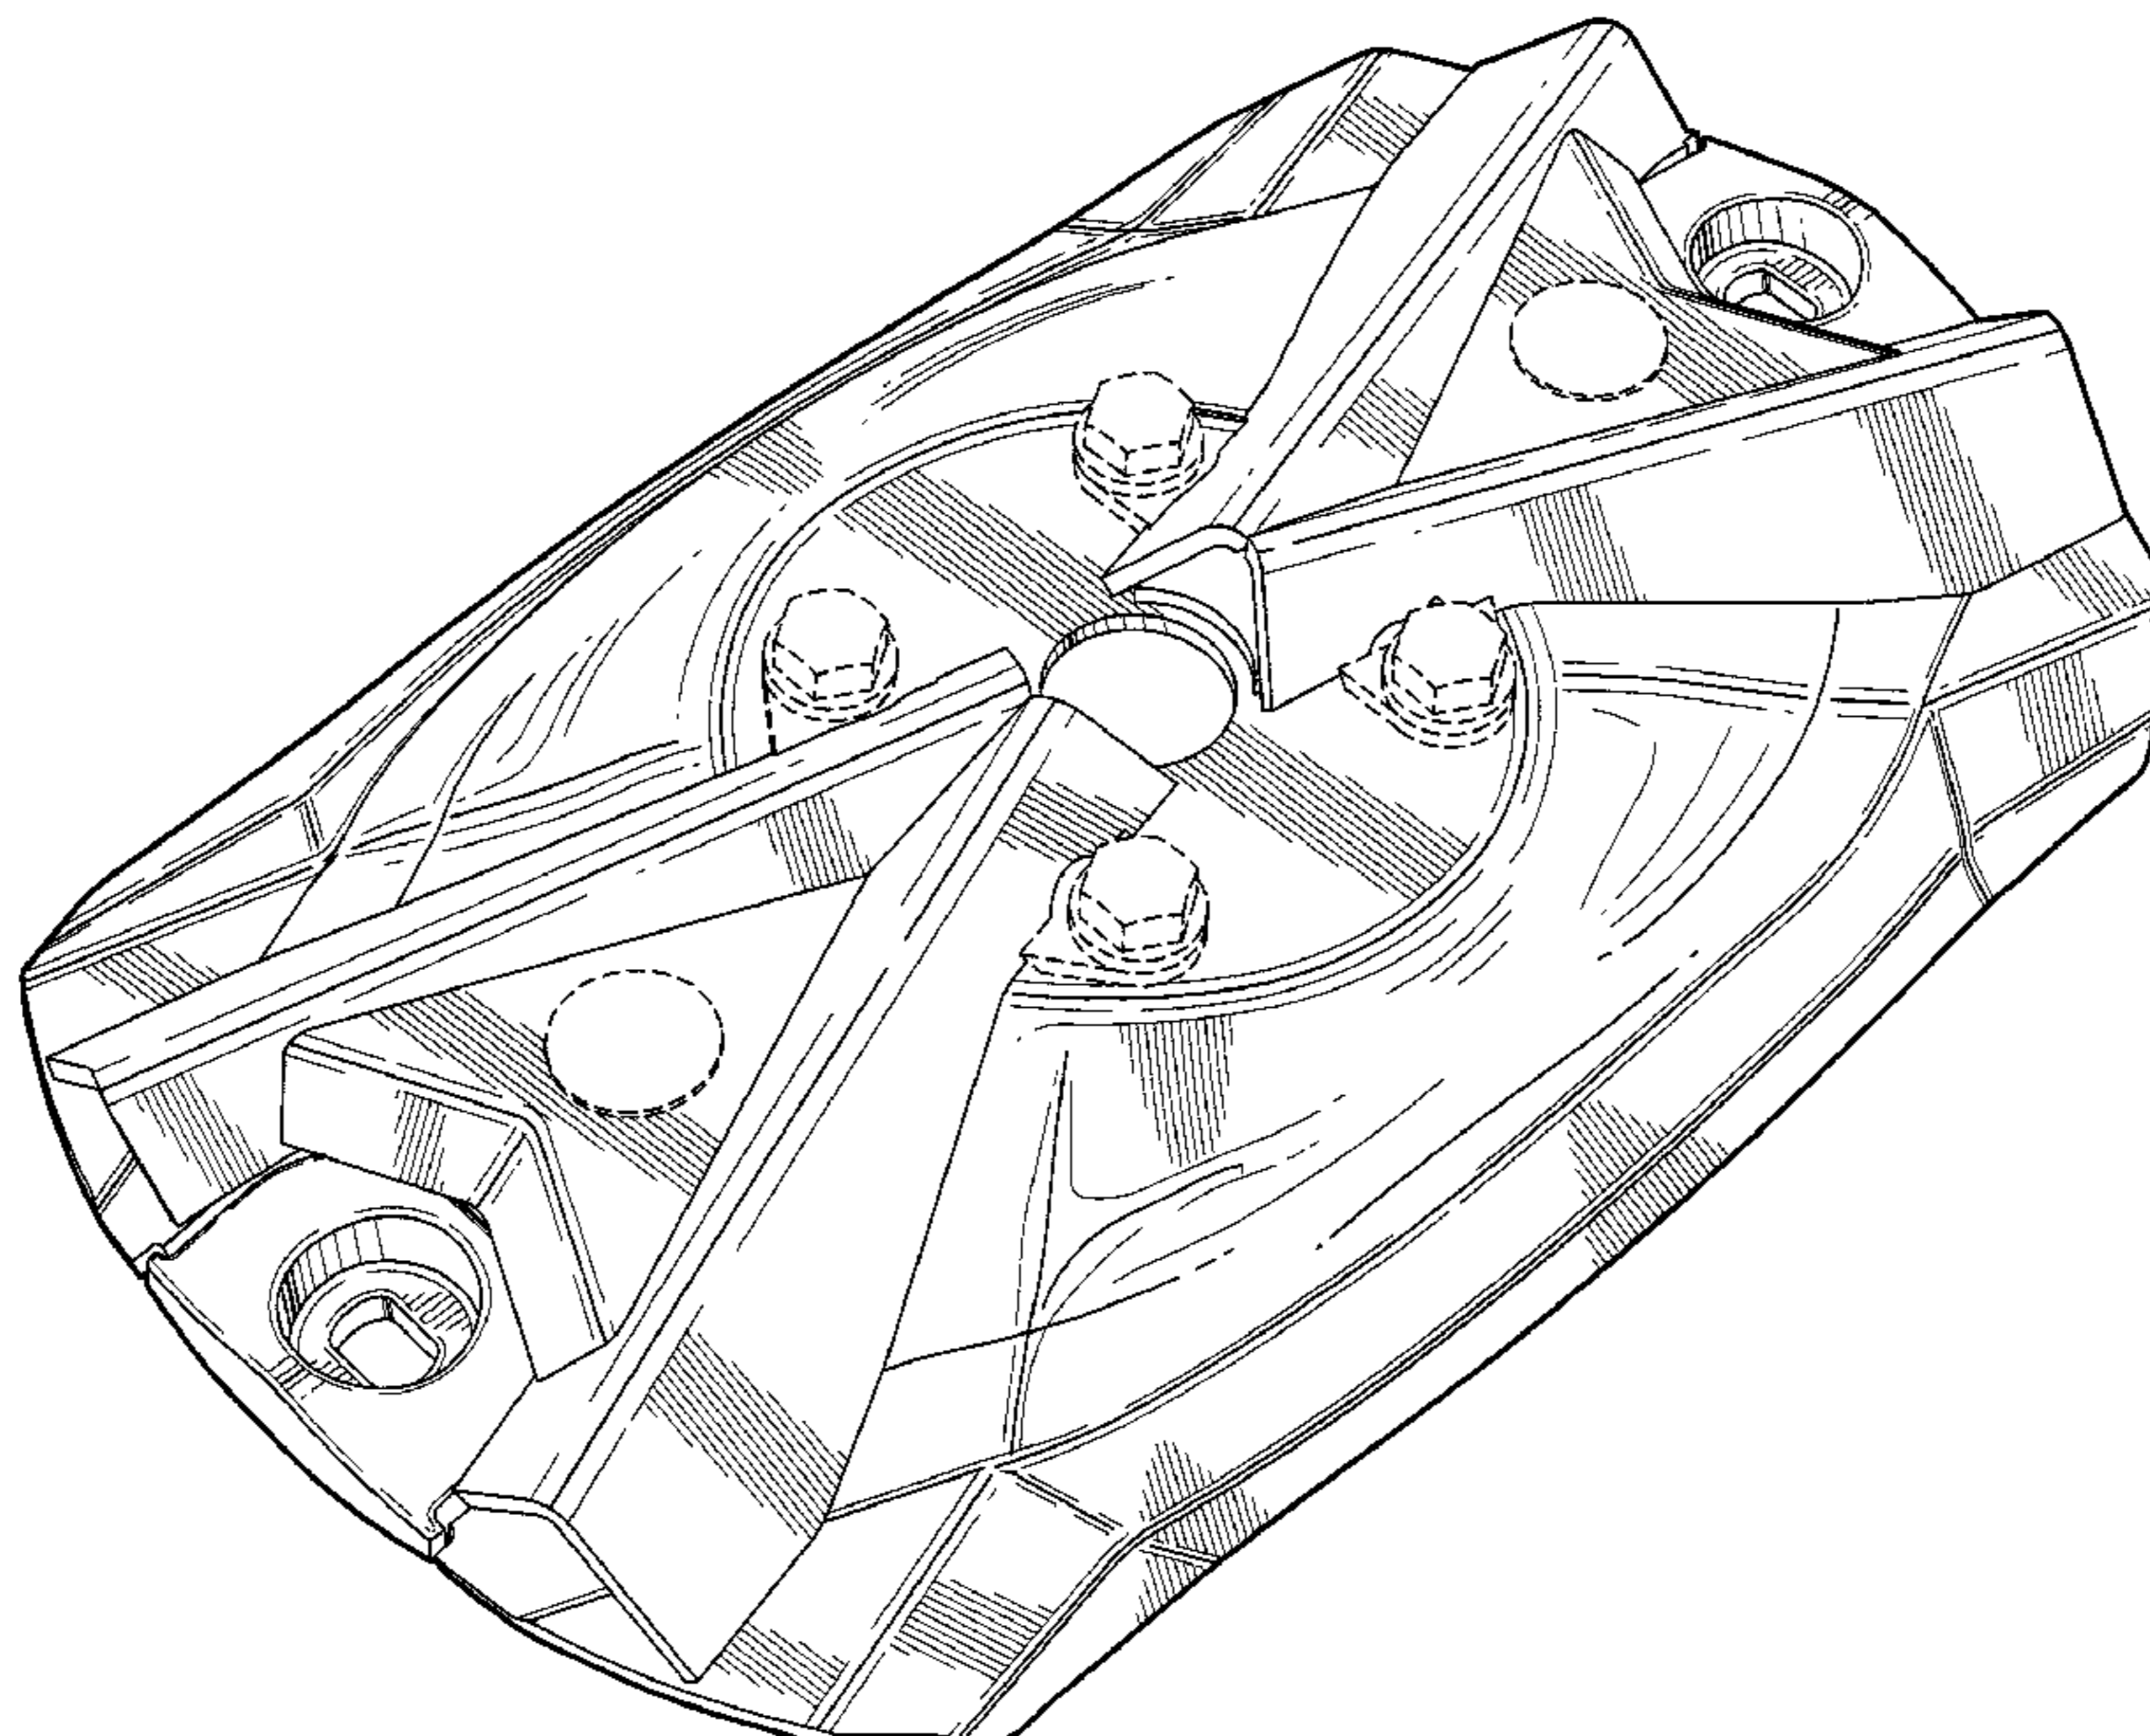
is a rear, bottom, and left side perspective view thereof;
